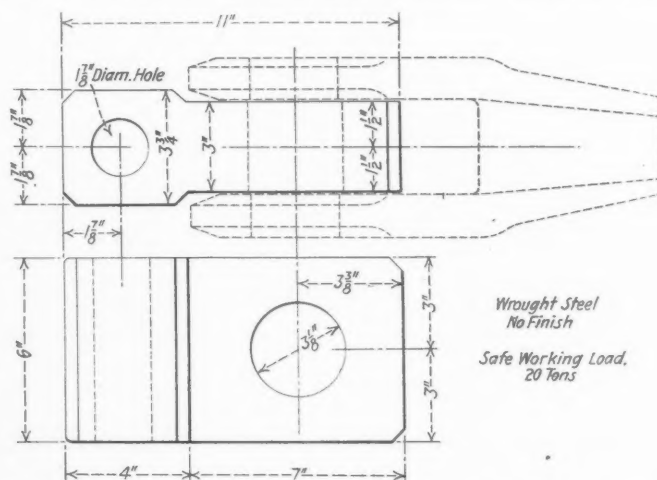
Drawing of Link for Attaching a Cable to the Coupler of a Car
